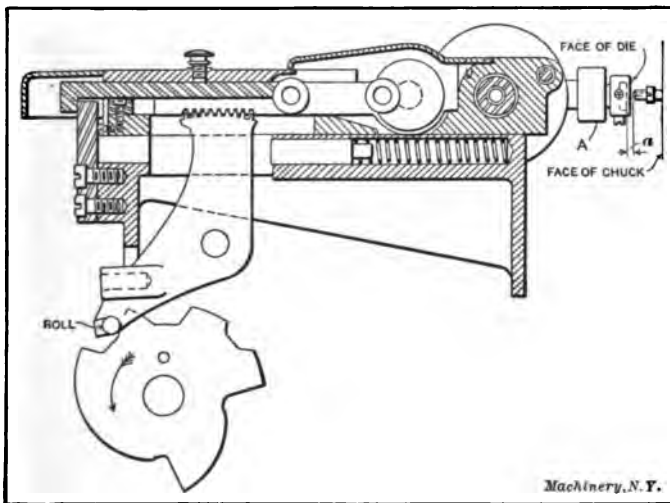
Position of Roll on Thread Lobe when setting Die or Tap
